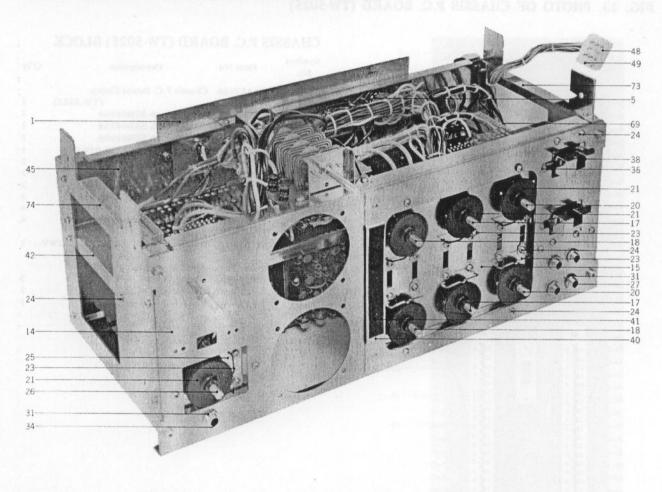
PHOTO OF CHASSIS P.C. BOARD (TW-5025)
